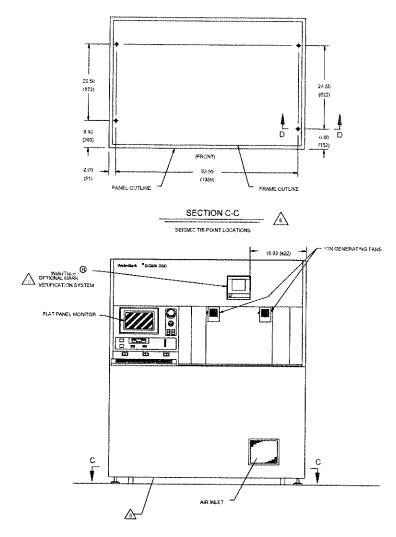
Handler/Control Marker Installation Footprint Dimensions — Front View
